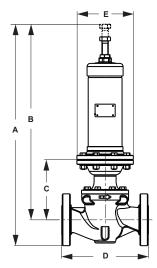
Type CT88 Backpressure Regulator Dimension Drawing
